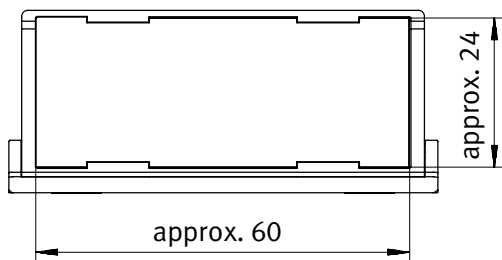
/4: Inscription label holders for EL modules, type ASCF-H-E2 (dimensions in mm)
